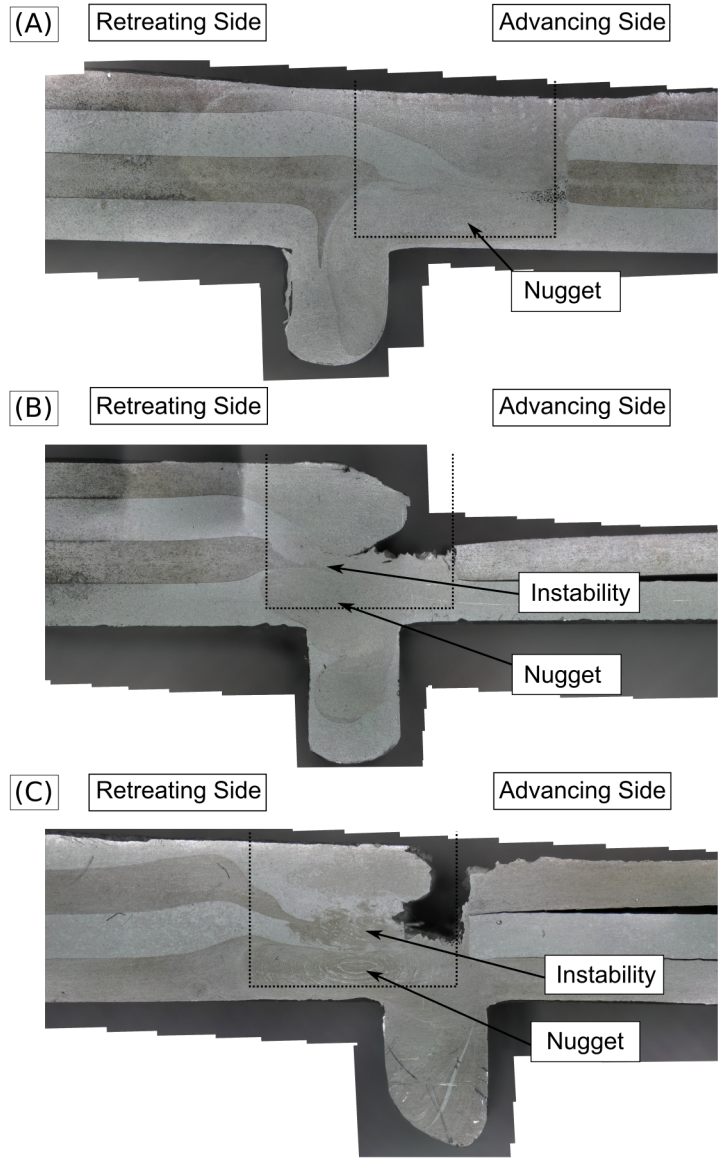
FSE weld with (A) tool offset to advancing side, (B) tool centered, and (C) Tool offset to retreating side. The darker etched alloy is the AA5052, and the lighter is the AA6061. The dotted lines show the estimated pin location.
